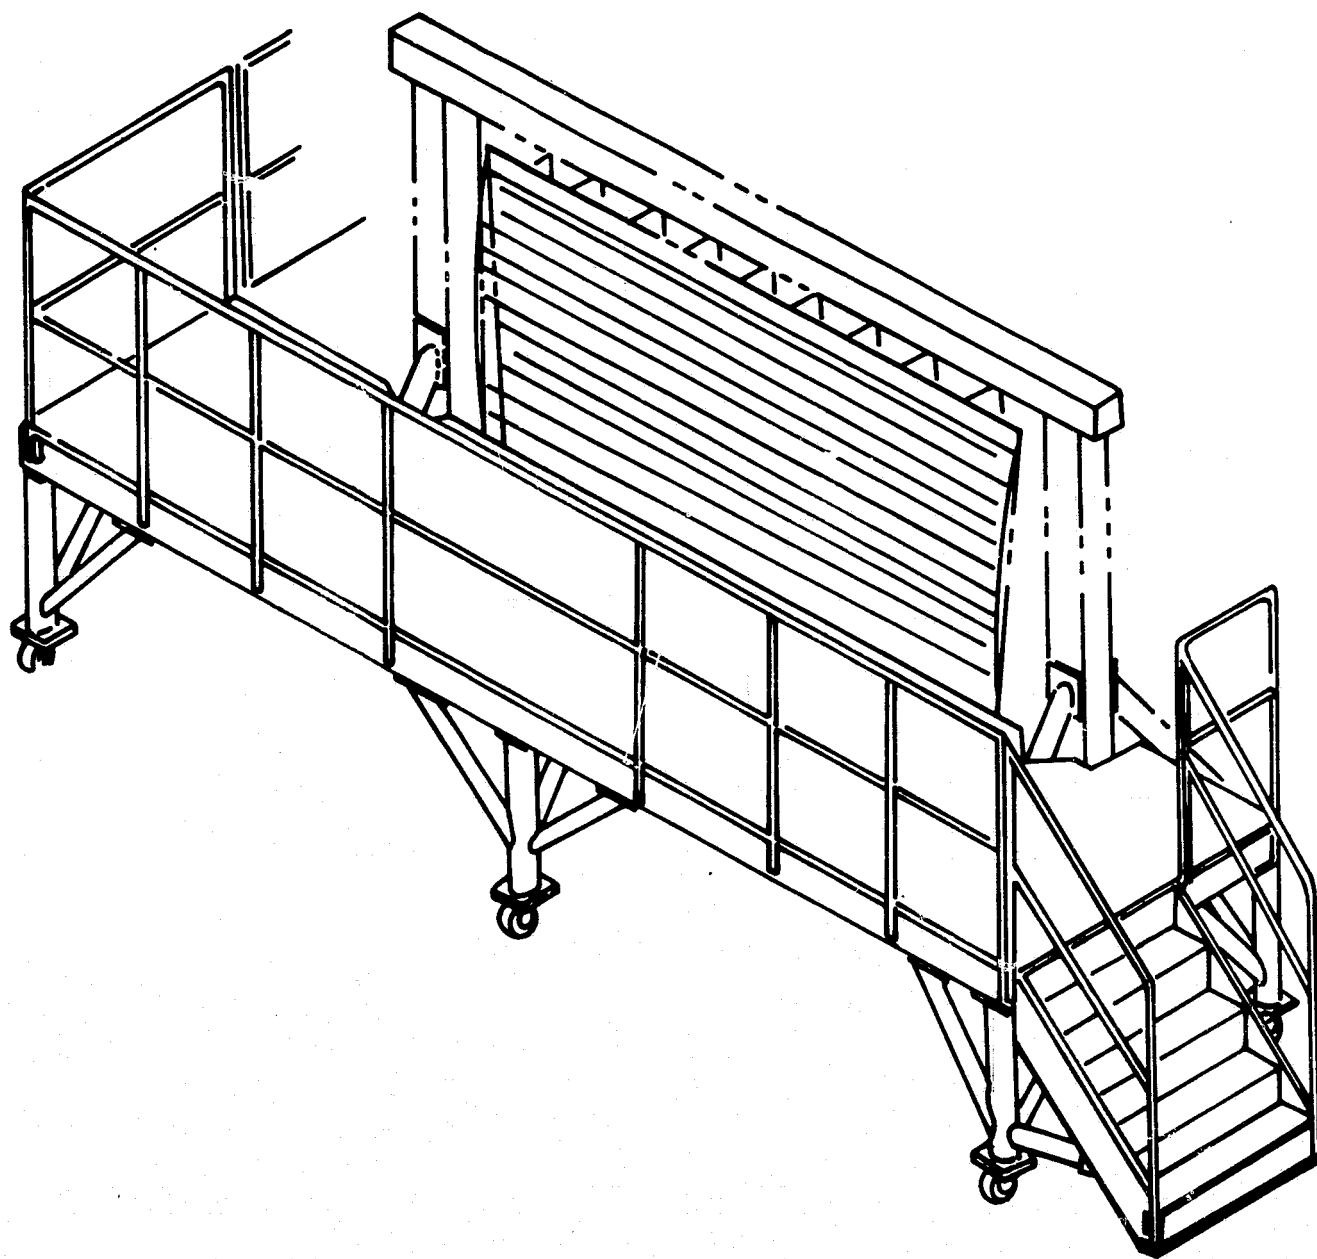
SKIN PANEL ASSEMBLY PERSONNEL PLATFORM
